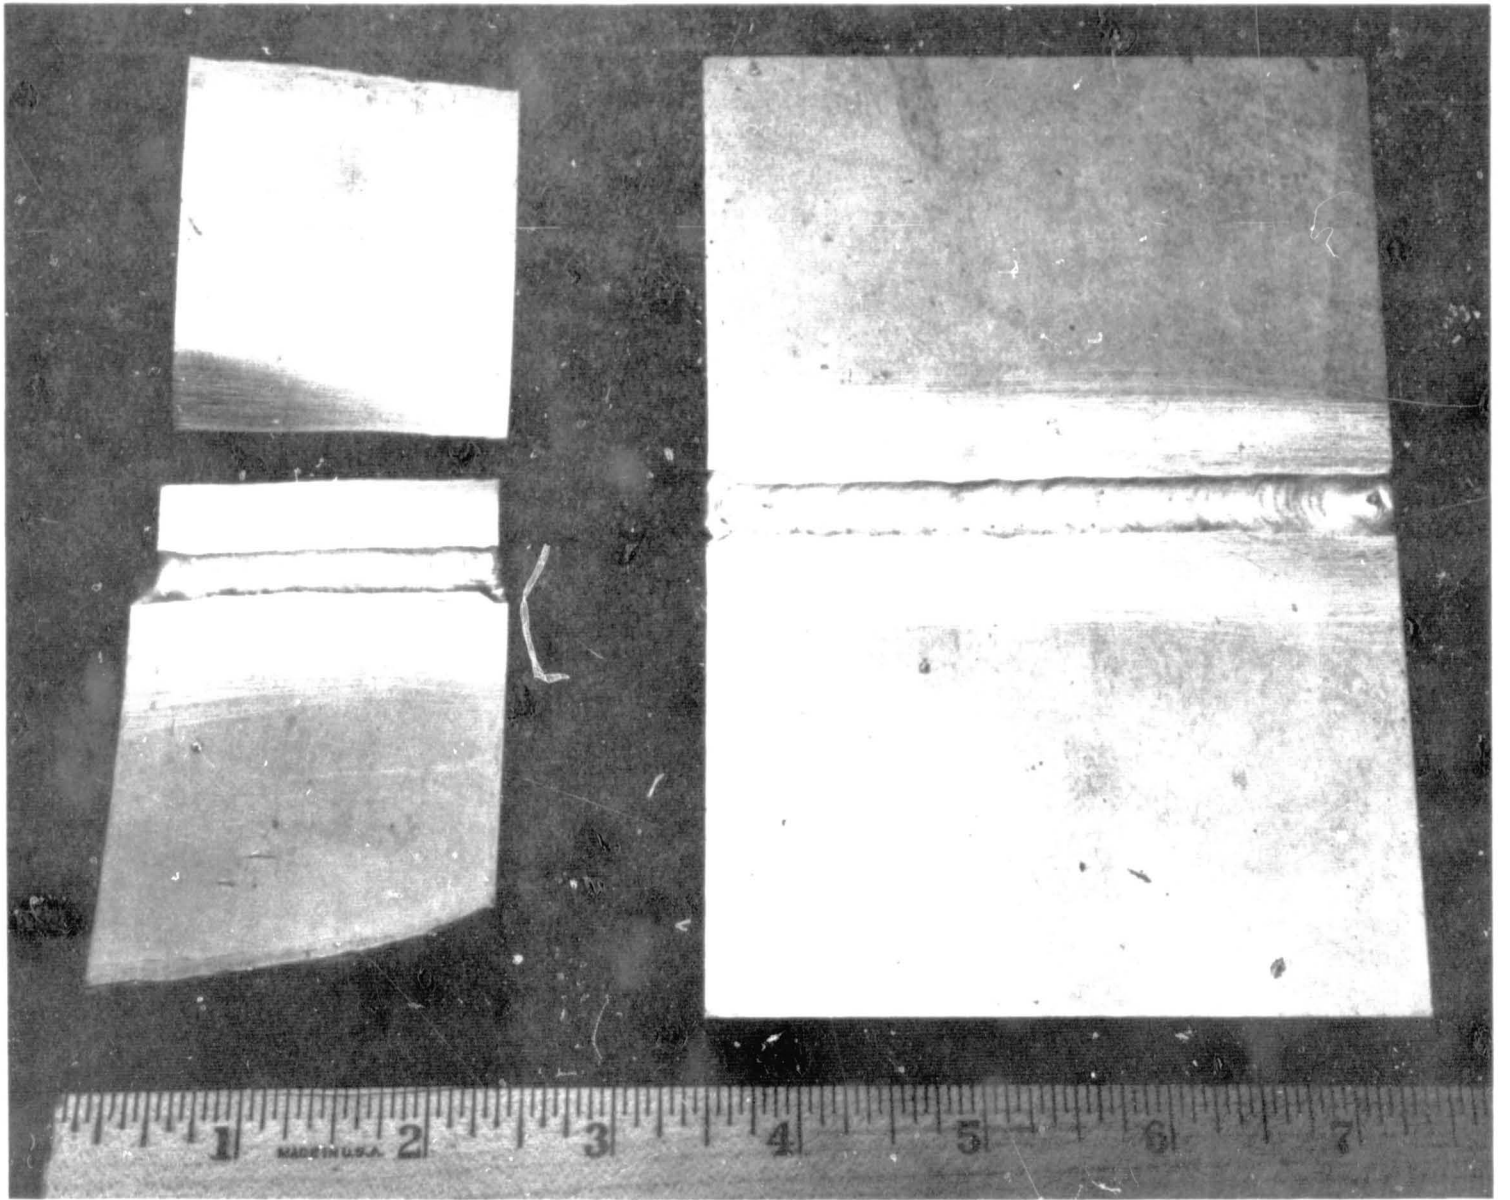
Welded Panels Of Alloy 1A6 Showing A Test Panel That Broke Upon Impact In An Area Outside The Weld.
